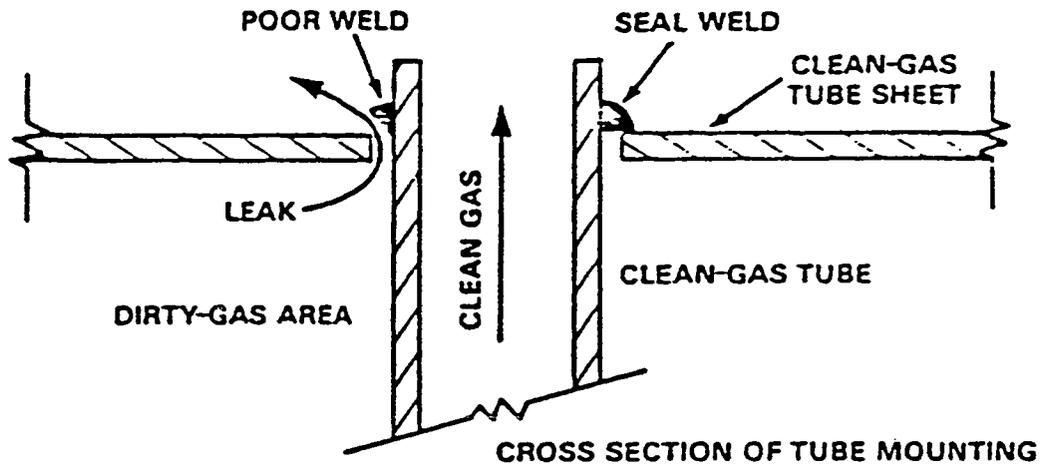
Example of clean-gas outlet tube and clean-gas tube sheet leaks.⁶
